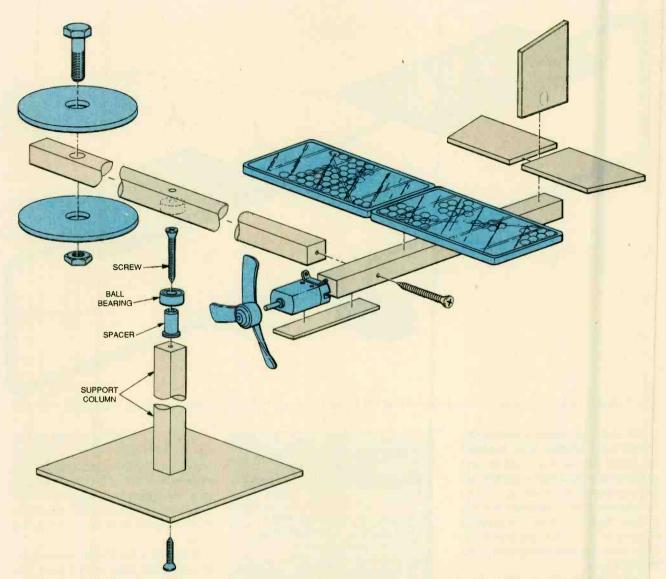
This is the general assembly of the airplane and its stand. Hot-melt glue, double-sided tape, and a few screws hold everything together.
